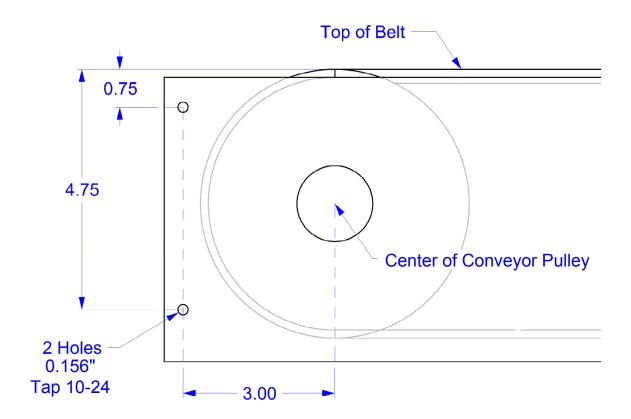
Bolt Pattern for mounting TD120 on Conveyor
